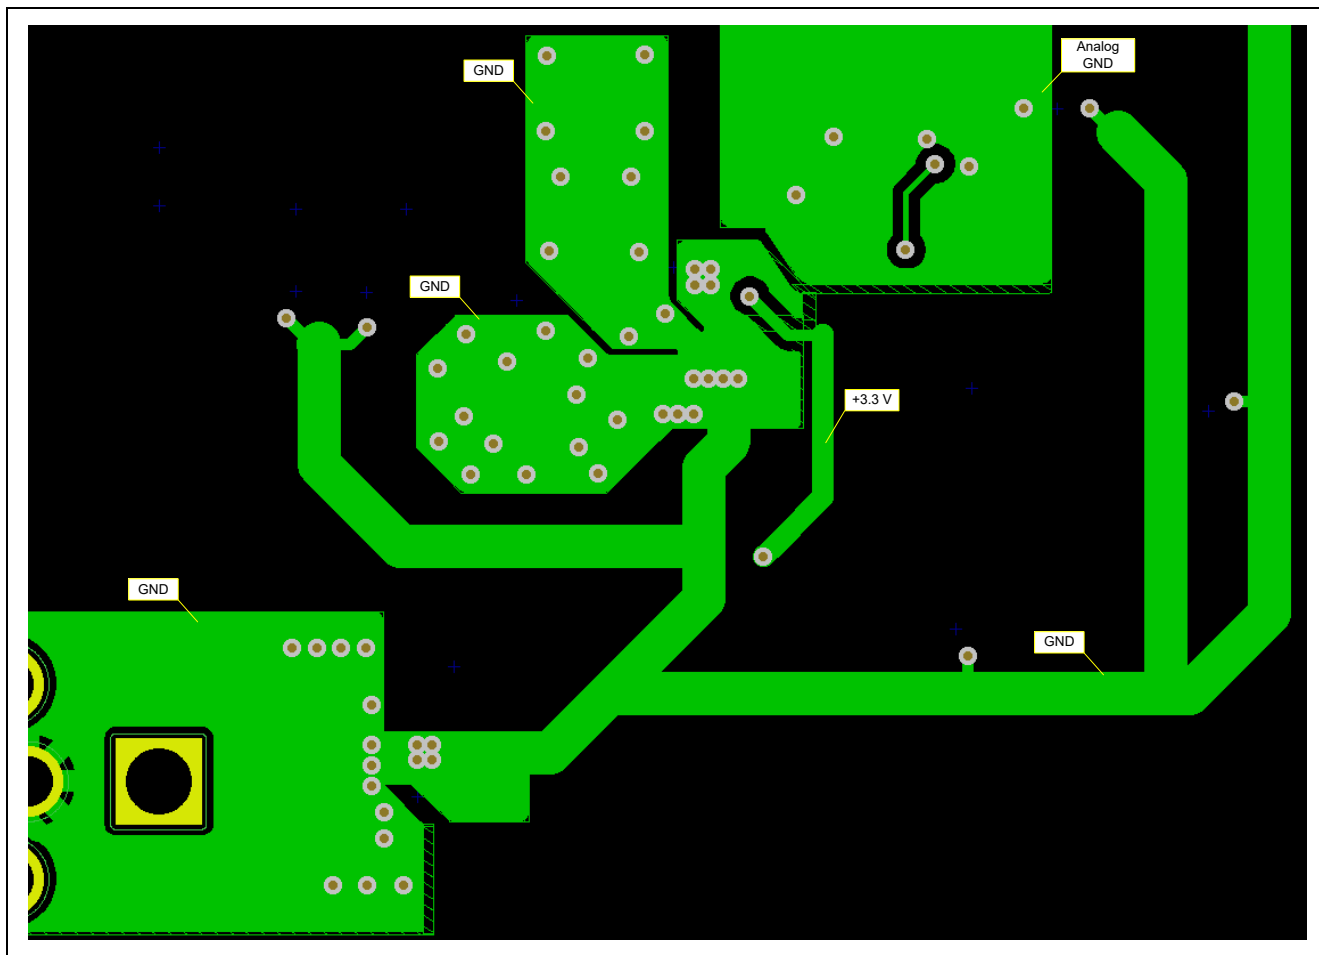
Example Board Wiring Pattern (Second Layer Wiring Pattern)
